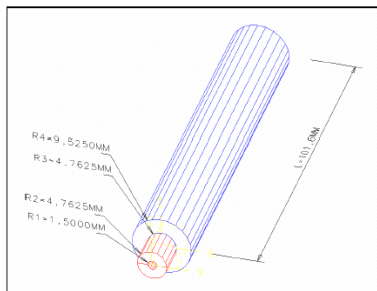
Dimensions of tool geometry for end mill with single damper design
